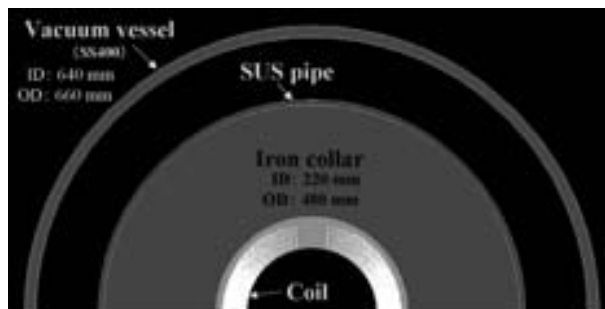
Cross-section of the superconducting dipole magnet for the rotating gantry
